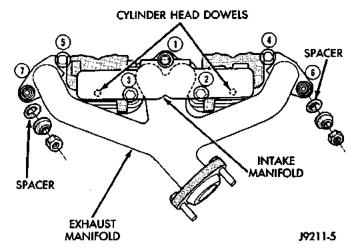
Intake/Exhaust Manifold 2.5L Engine
